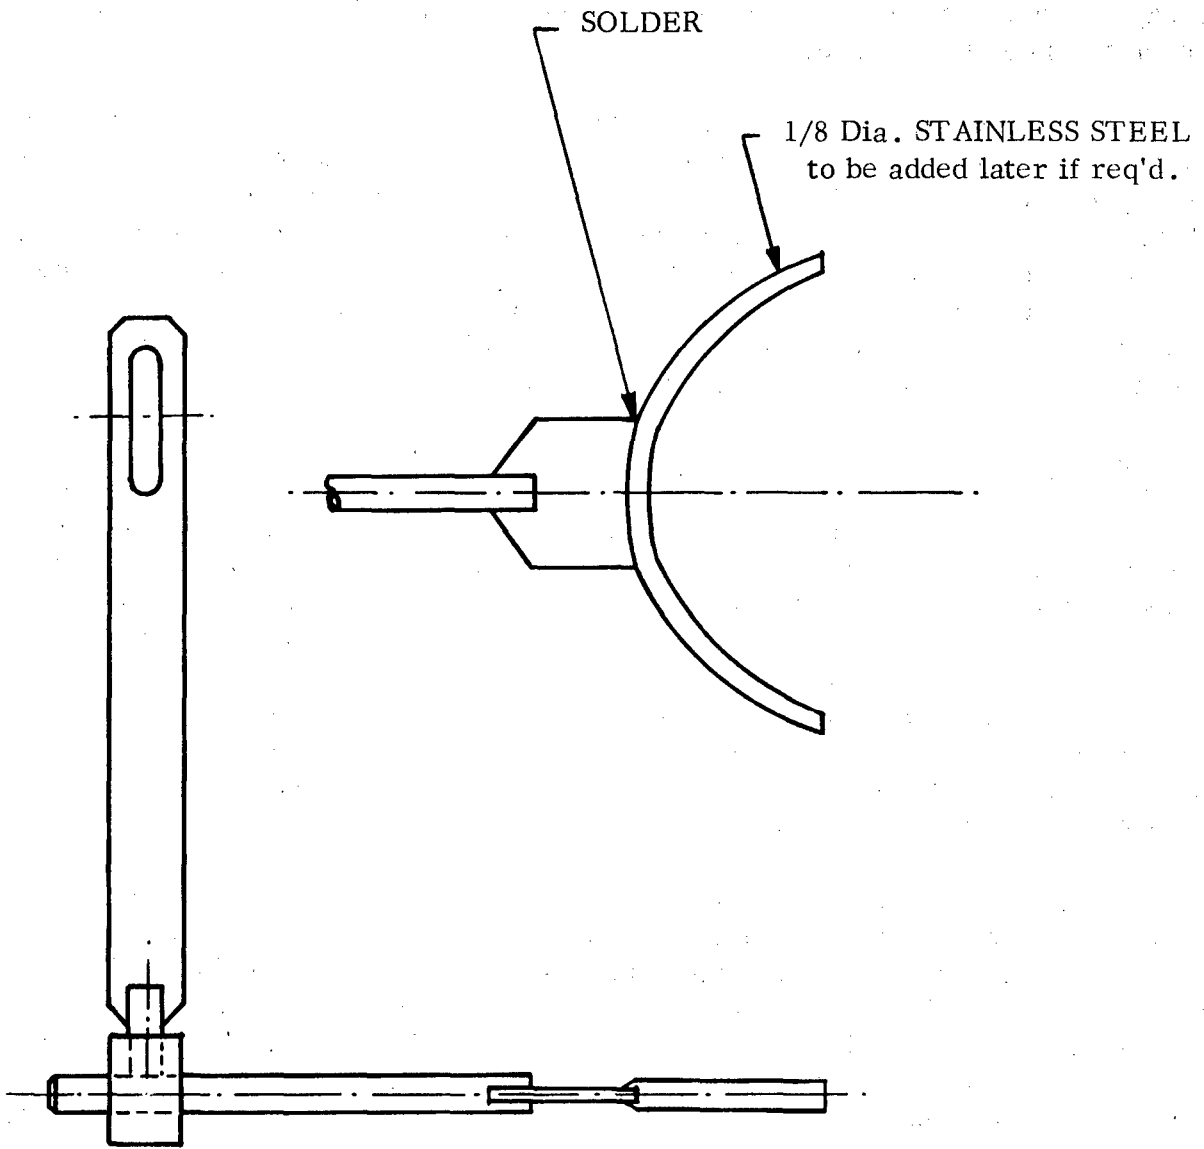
C. BITE BAR ASSEMBLY, ELEVATION VIEW WITH DETAIL VIEW OF OPTIONAL REINFORCED BITE BAR BLADE (Assembly is attached to nose-rest mounting bracket.)
